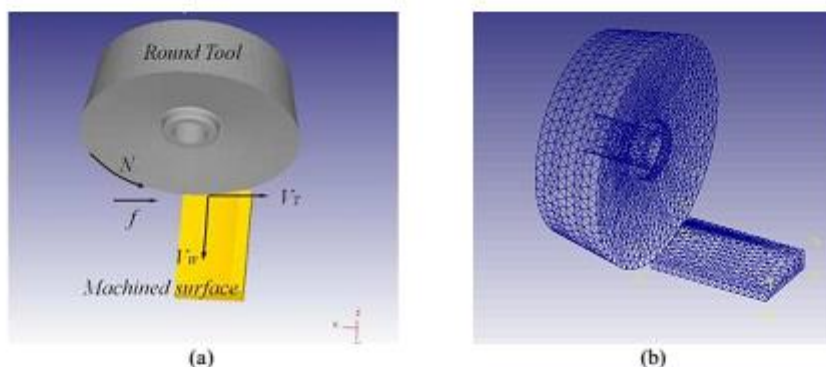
(a) Kinematic modeling of rotary tool, (b) Meshing of rotary tool turning
